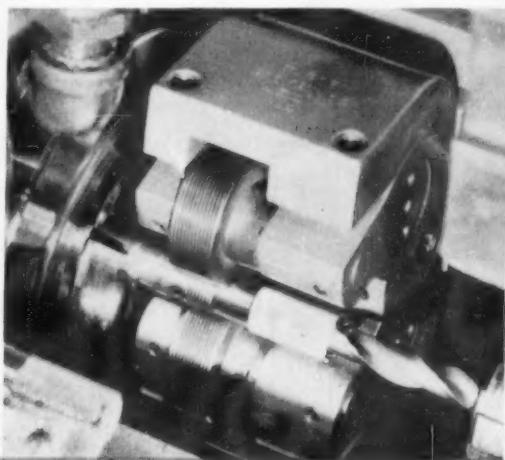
Illustration showing threads being rolled behind shoulder as piece is drilled.
